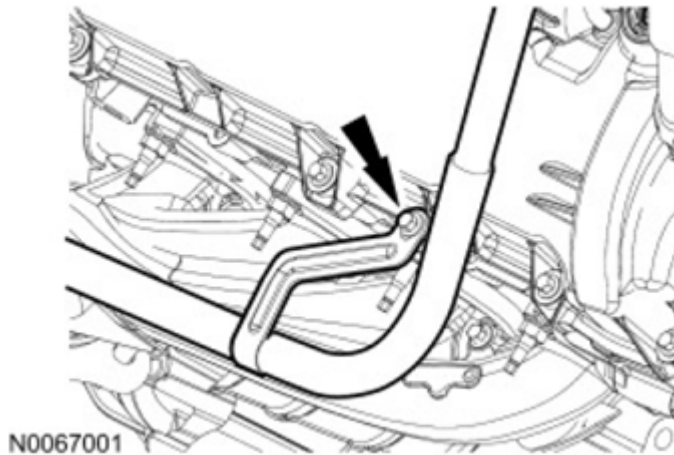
Locating Transmission Fluid Level Indicator Tube And Bolt
